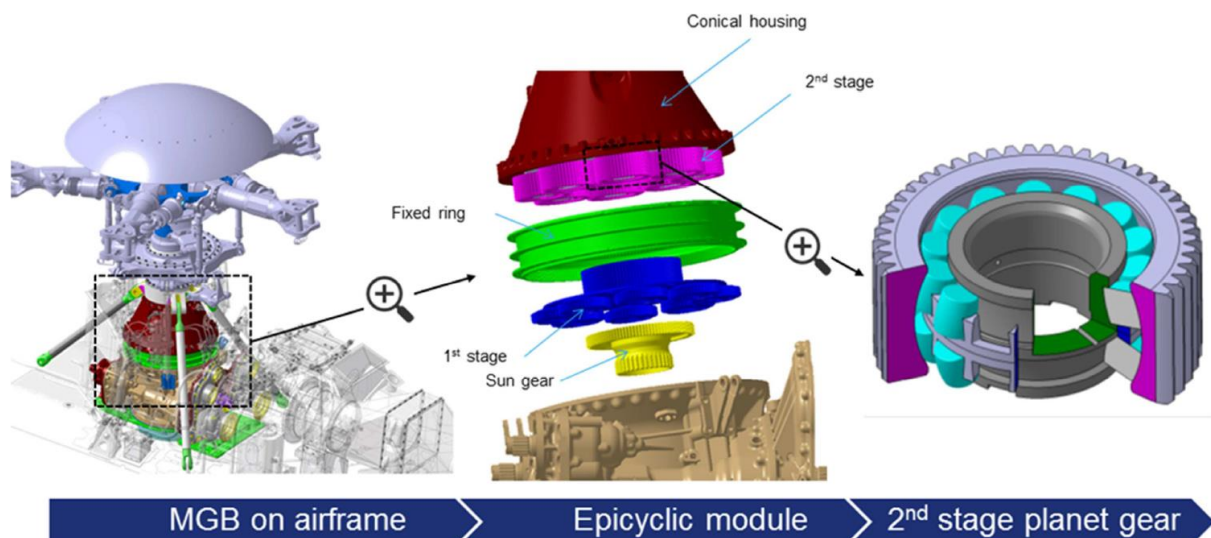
Illustration of the MGB installation, exploded view of epicyclic module and one second stage planet gear. Source: Airbus Helicopters
